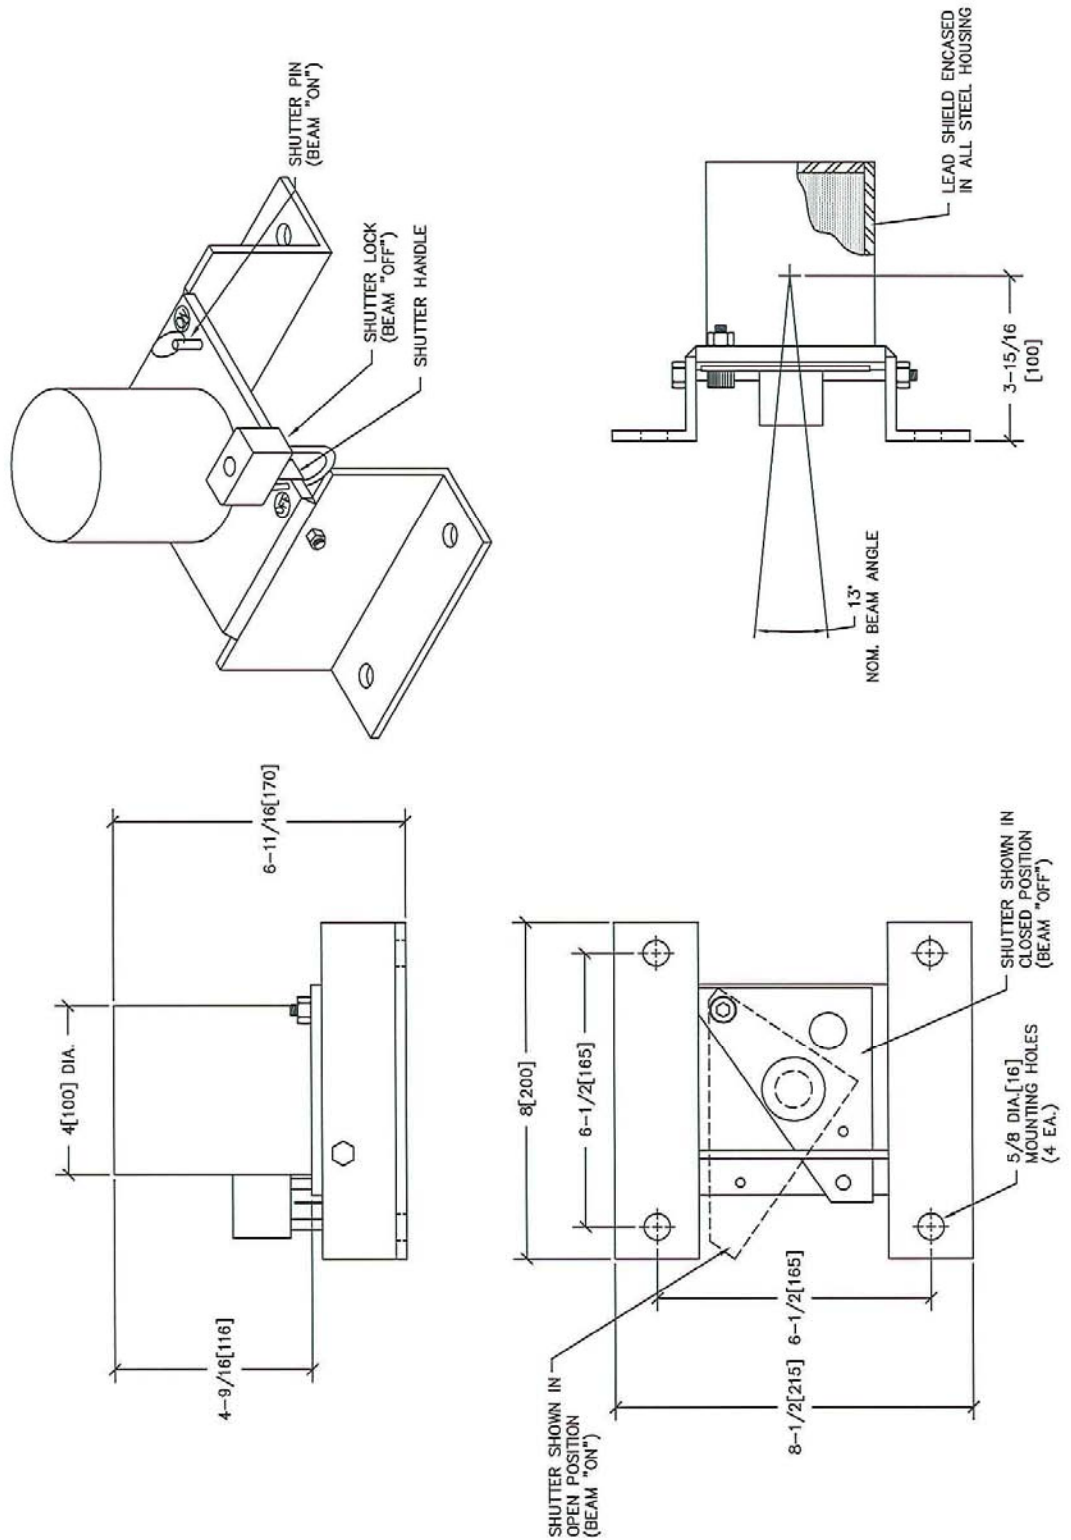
864563: Mounting dimensions, 5200 source housing, 100 mCi or less (sheet 1 of 1)
